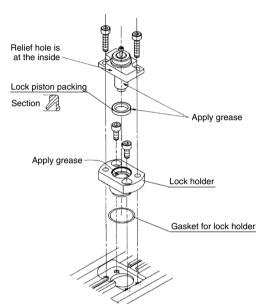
Reassembling of end lock part (Ø20, Ø25)
